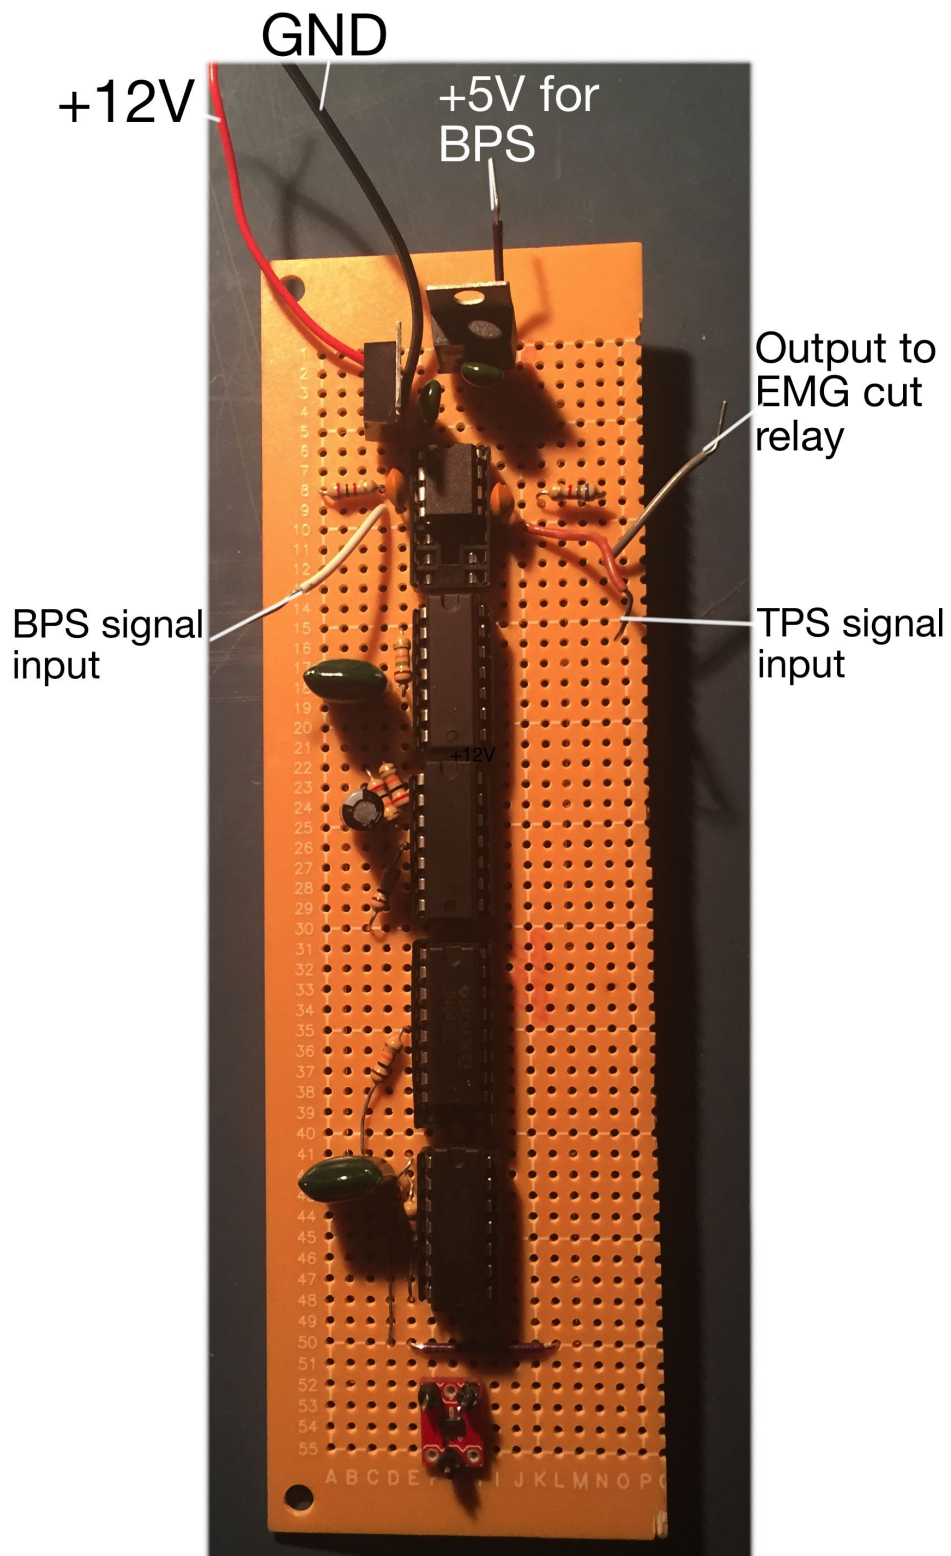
Final Brake Plausibility Device assembled on a perf-board.
